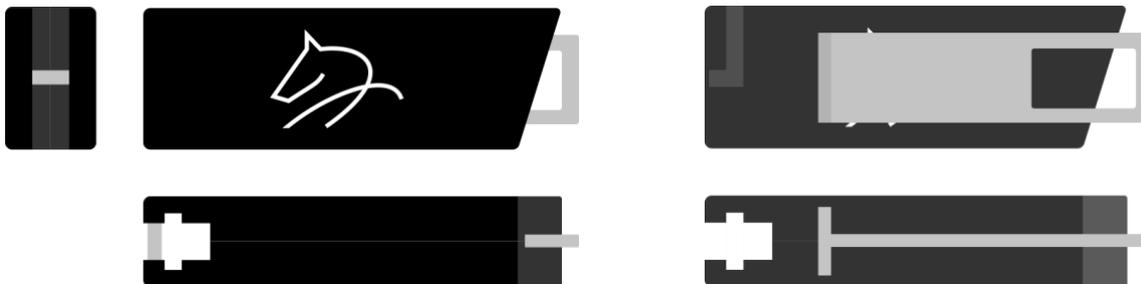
Side, bottom and front view of sensor as well as metal plate placement in relation to case.
